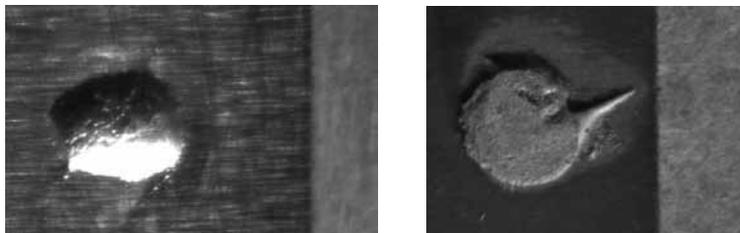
Solder after WBPCB heating: a) well soldered joint, b) not fully melted solder
